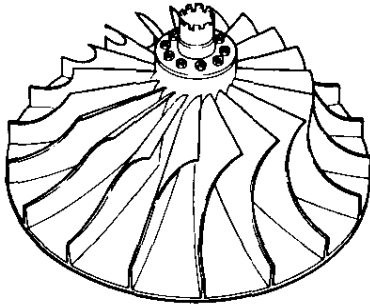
Turbo-compressor rotor for a gas turbine.
